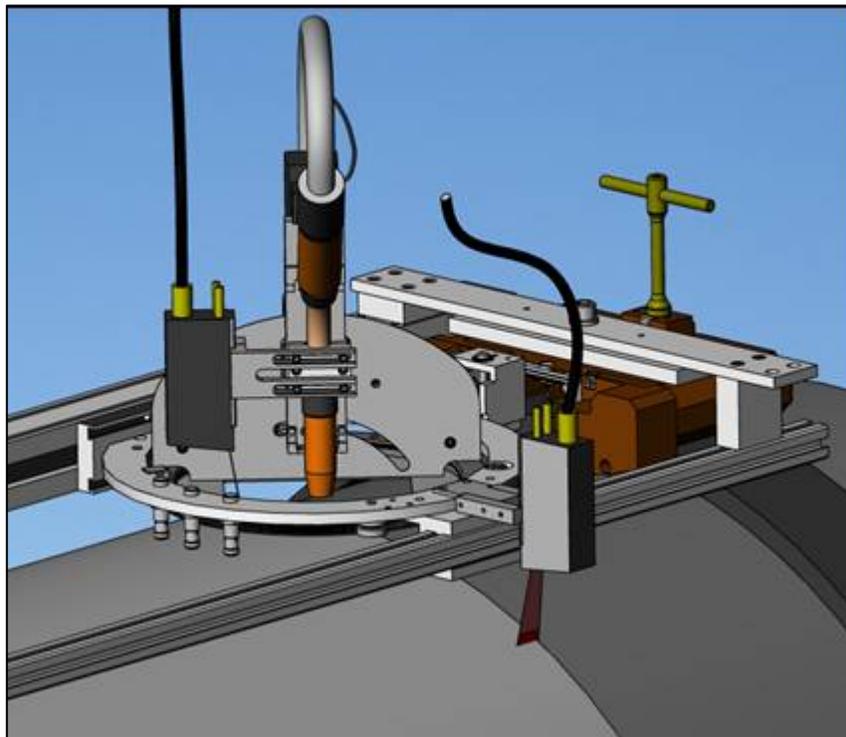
Illustration with Additional Laser Sensor Mounted on Bracket
